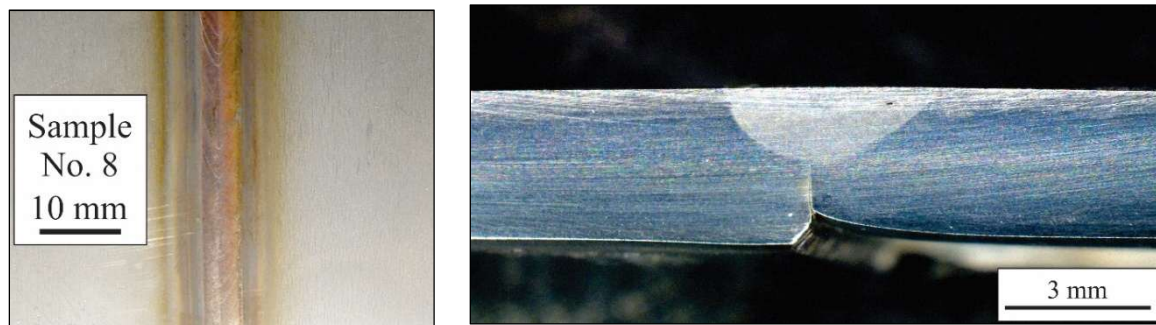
Specimen N° 8 - TAG, 80 A, no filler material
